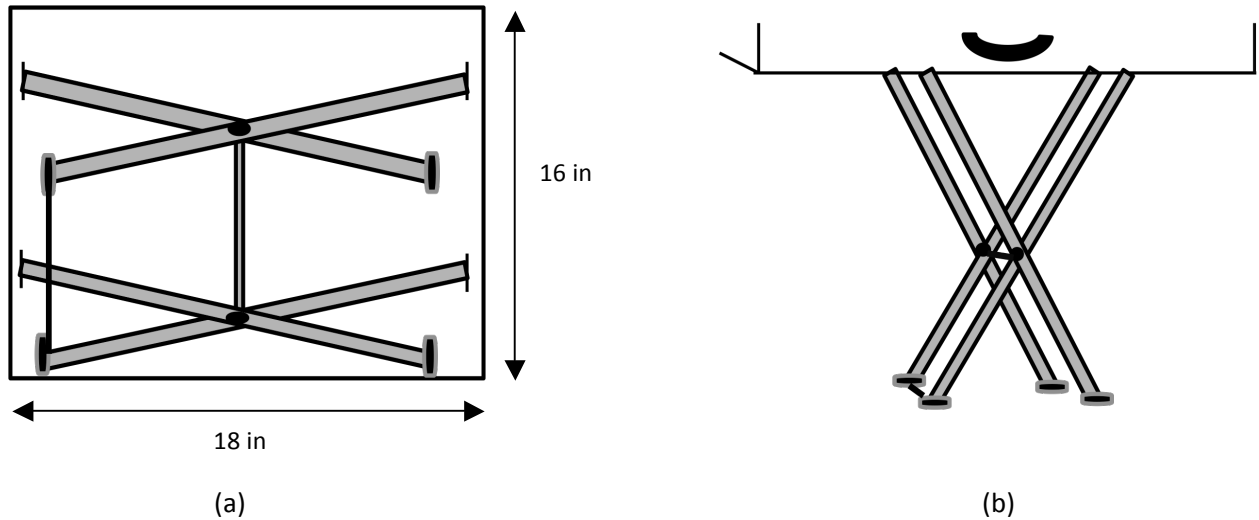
Collapsible legs design: (a) bottom view, (b) side view
